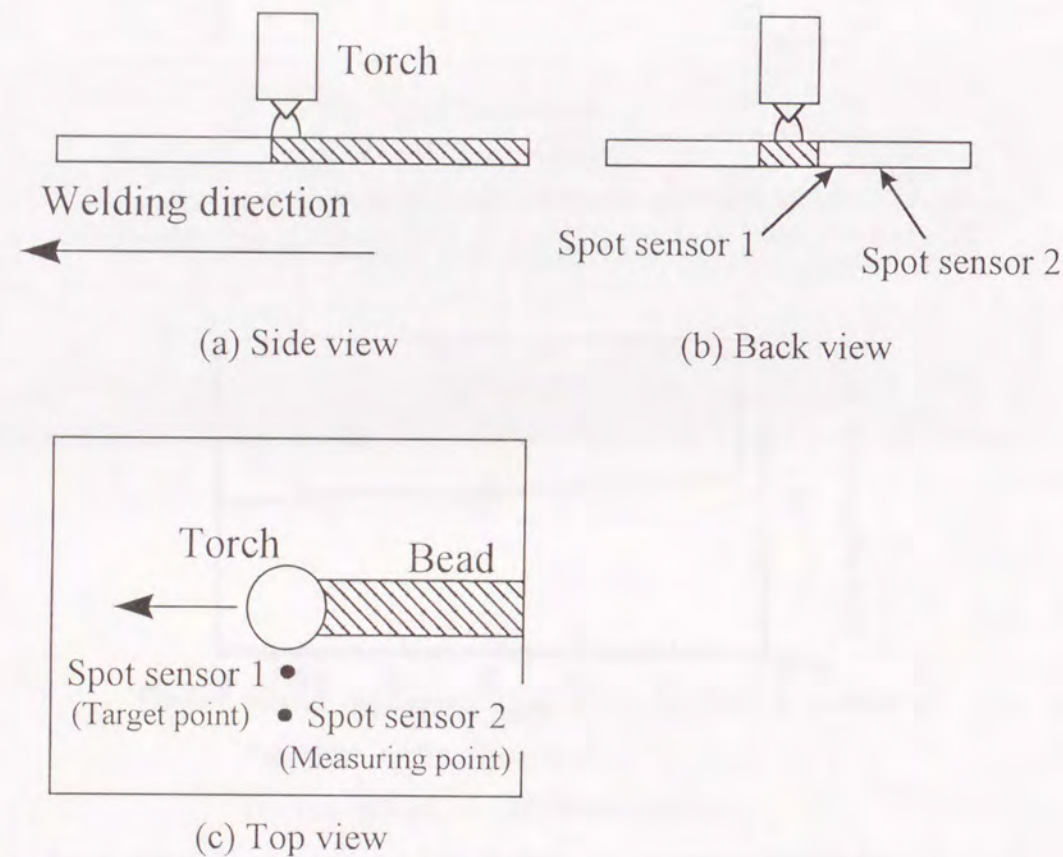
Schematic of measuring method for temperature at bottom surface by spot sensor in GTA welding on thin plate
